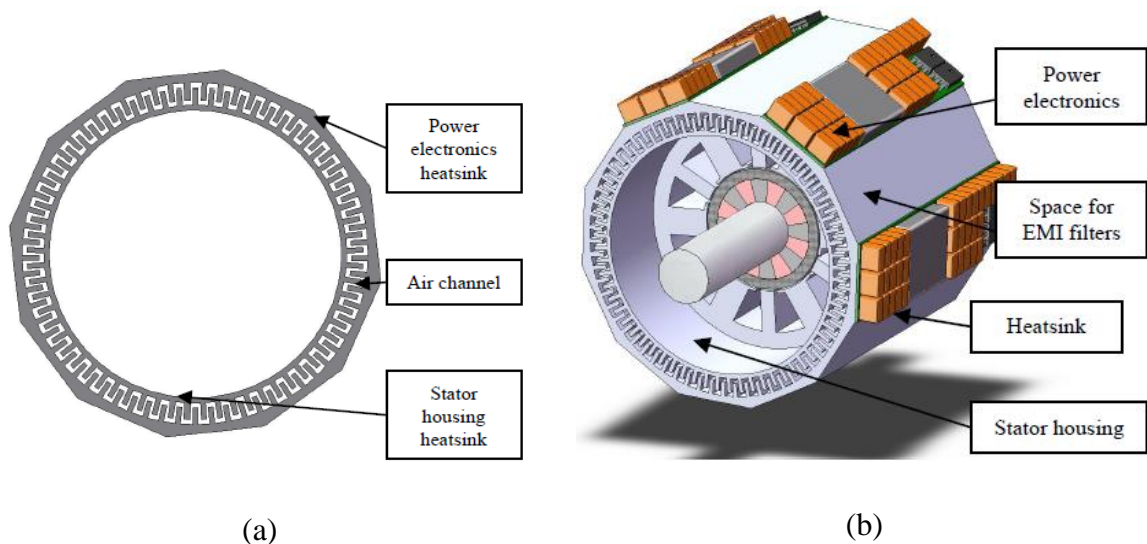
Axial presentation of integrated motor-shaped inductor
